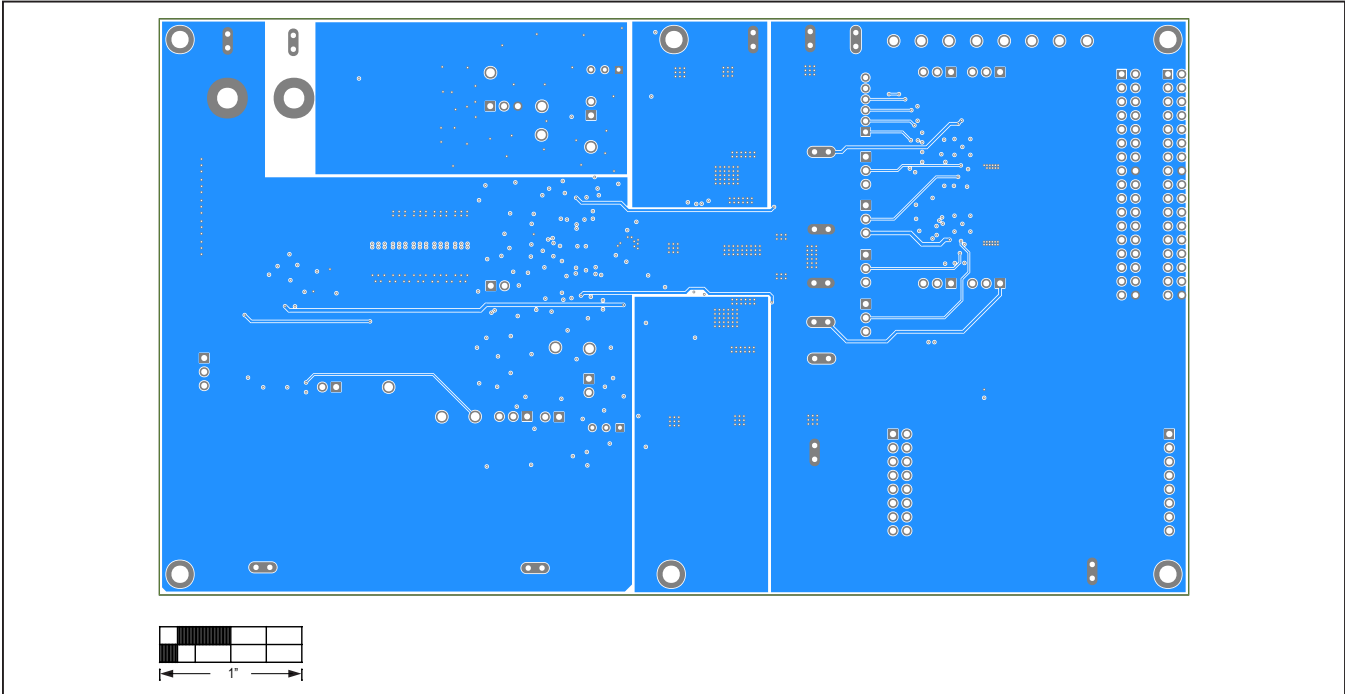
MAX20092 EV Kit PCB Layout—Bottom Layer
